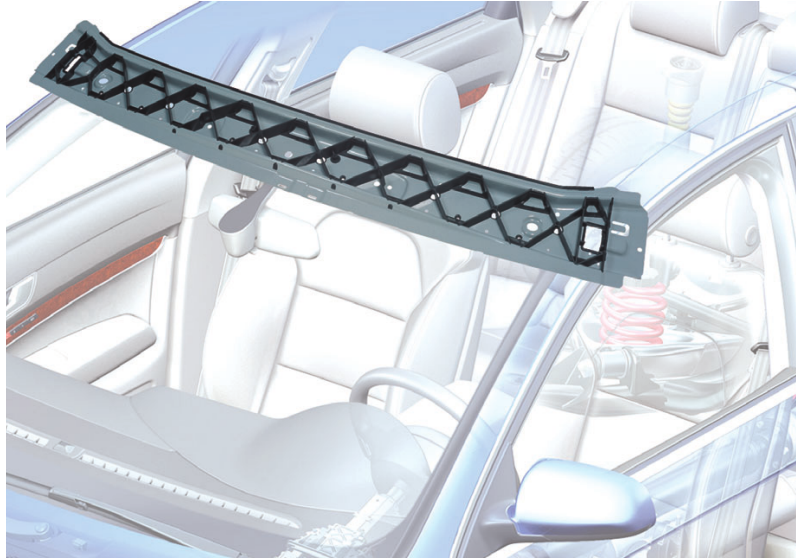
Example of reinforcement extruded structure: metallic roof beam reinforced with extruded plastic ribs (*Source: [65]*).
